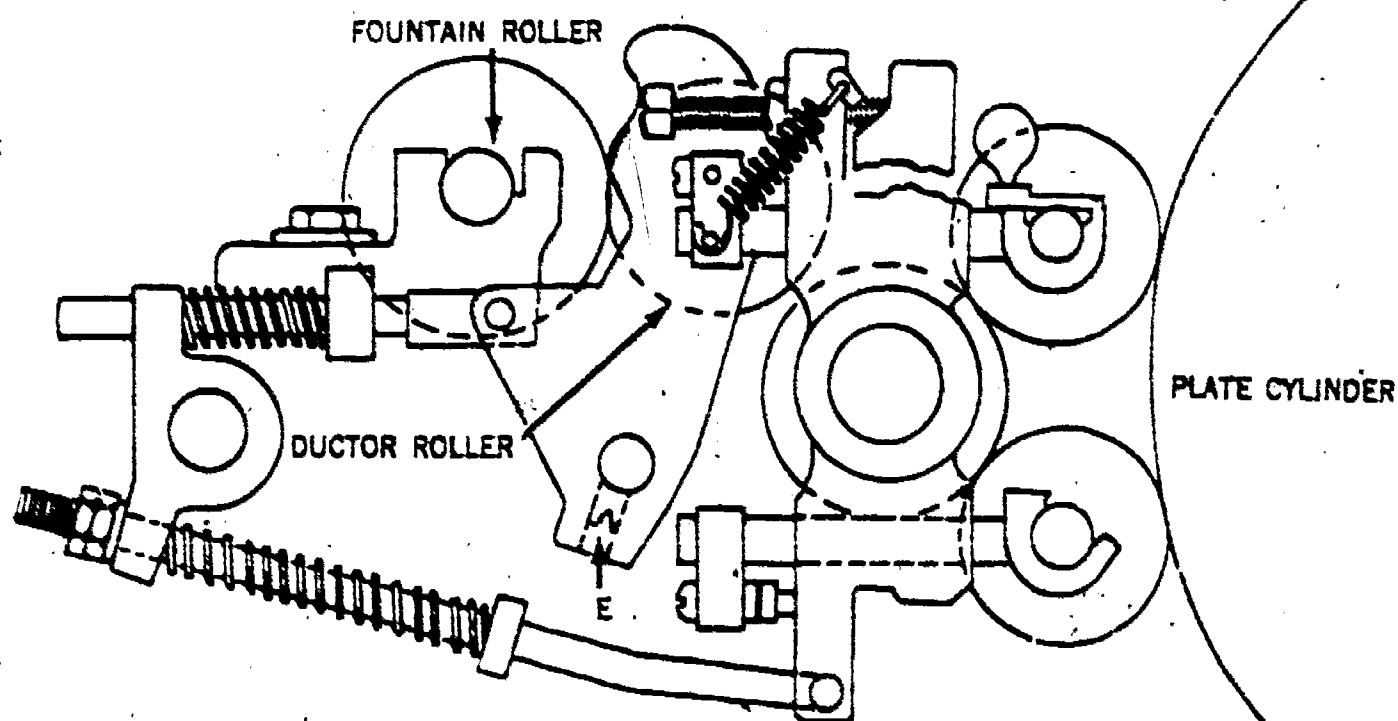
Setting and adjusting ductor roller (dampening assembly).
